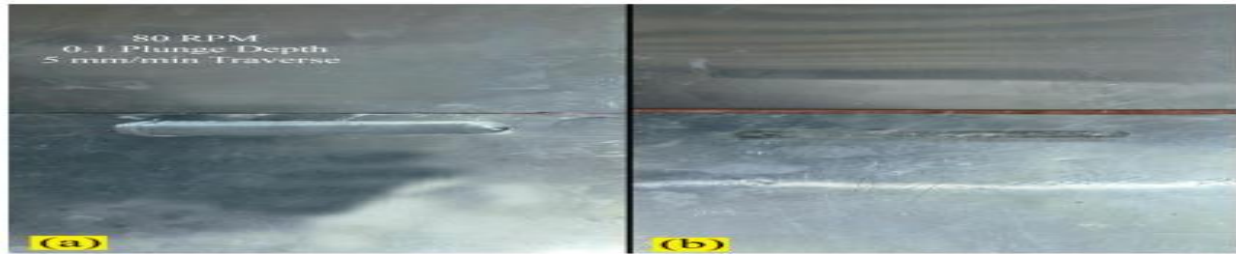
FSW at 800 RPM; 0.1 mm Plunge Depth; 5 mm/min Traverse Speed (a) Front Side of Weld (b) Back Side of Weld
